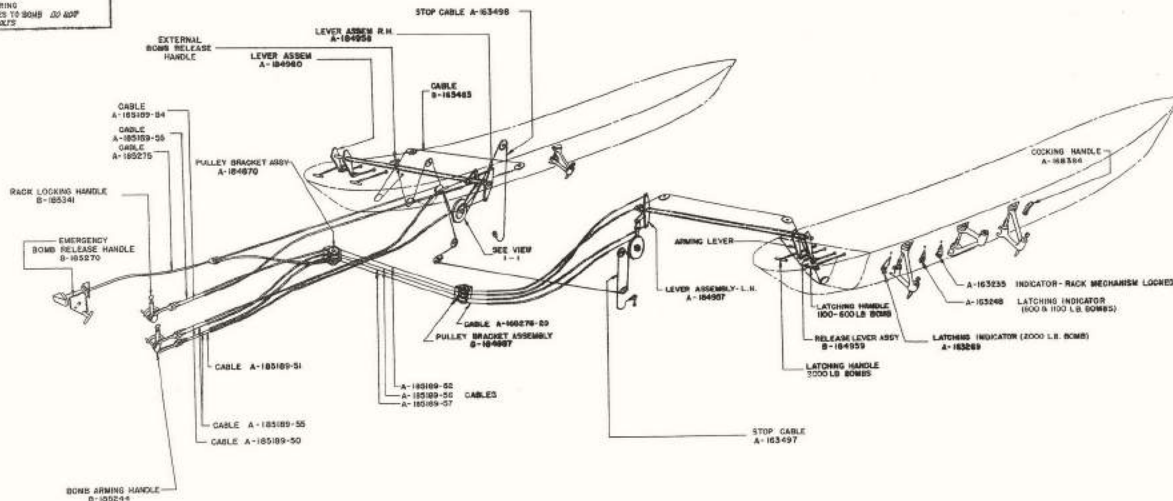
A RELEASE MECHANISM DIAGRAM FOR THE ELECTRICAL BOMB RACK
